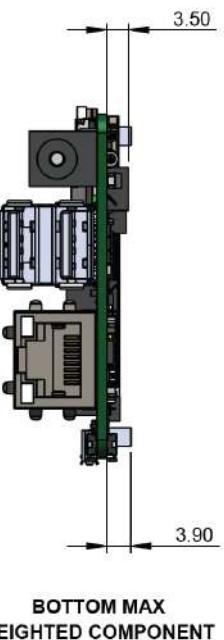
Mechanical Dimensions of STM32MP135 SBC Side View-1
